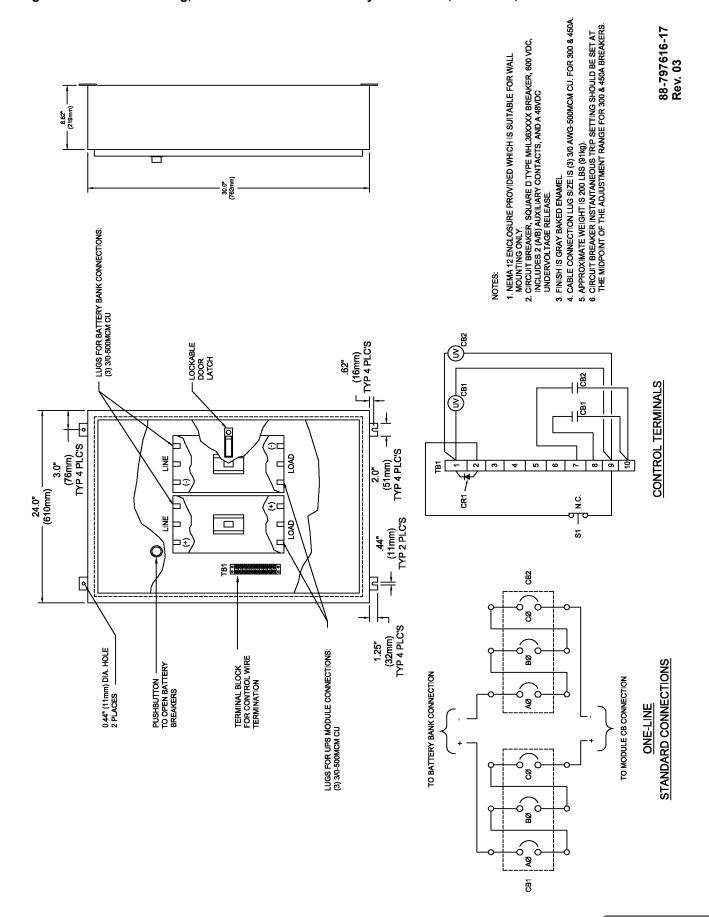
Outline drawing, single-breaker module battery disconnect, 300, 450, 600, 800, 1000, 1200A
